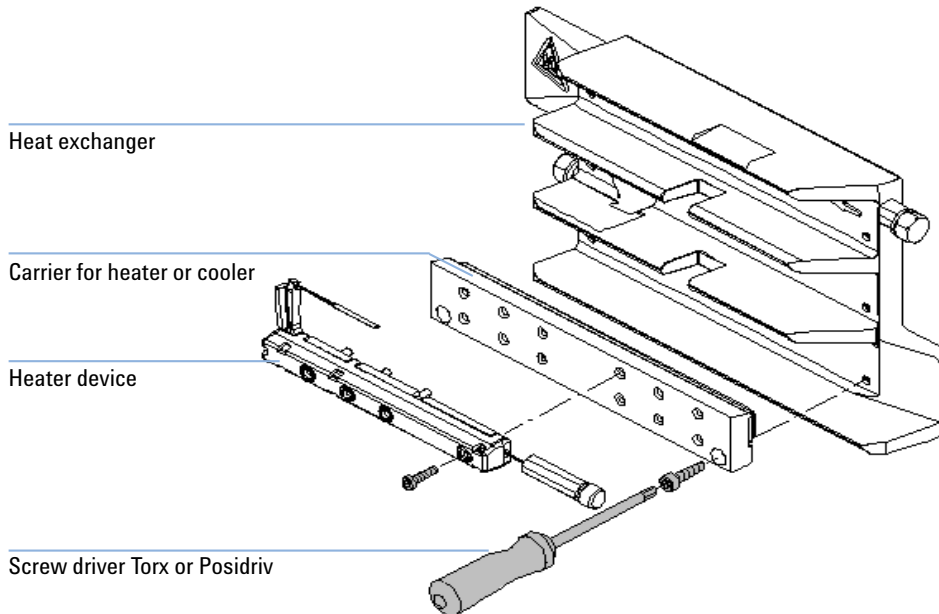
Fixing Heater or Cooling Devices (G1316B SL)
